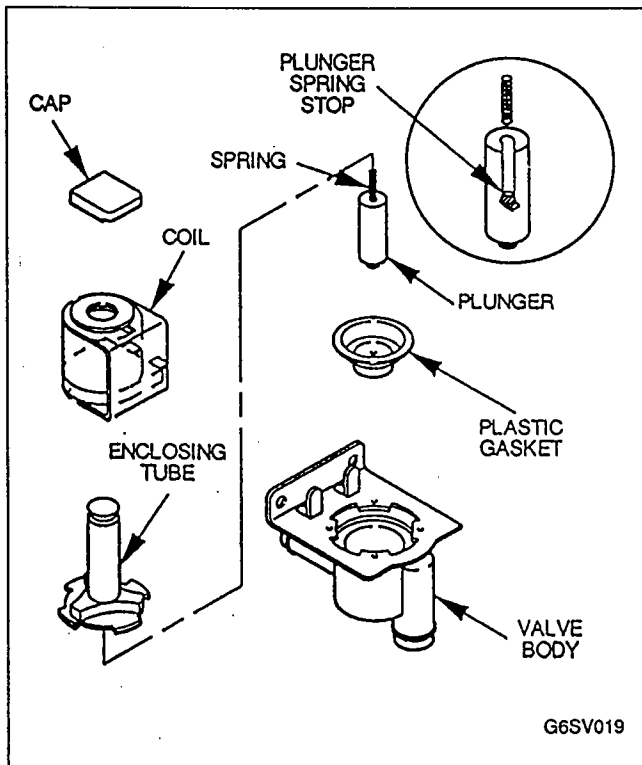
PLASTIC BODY WATER DUMP VALVE DISASSEMBLY
